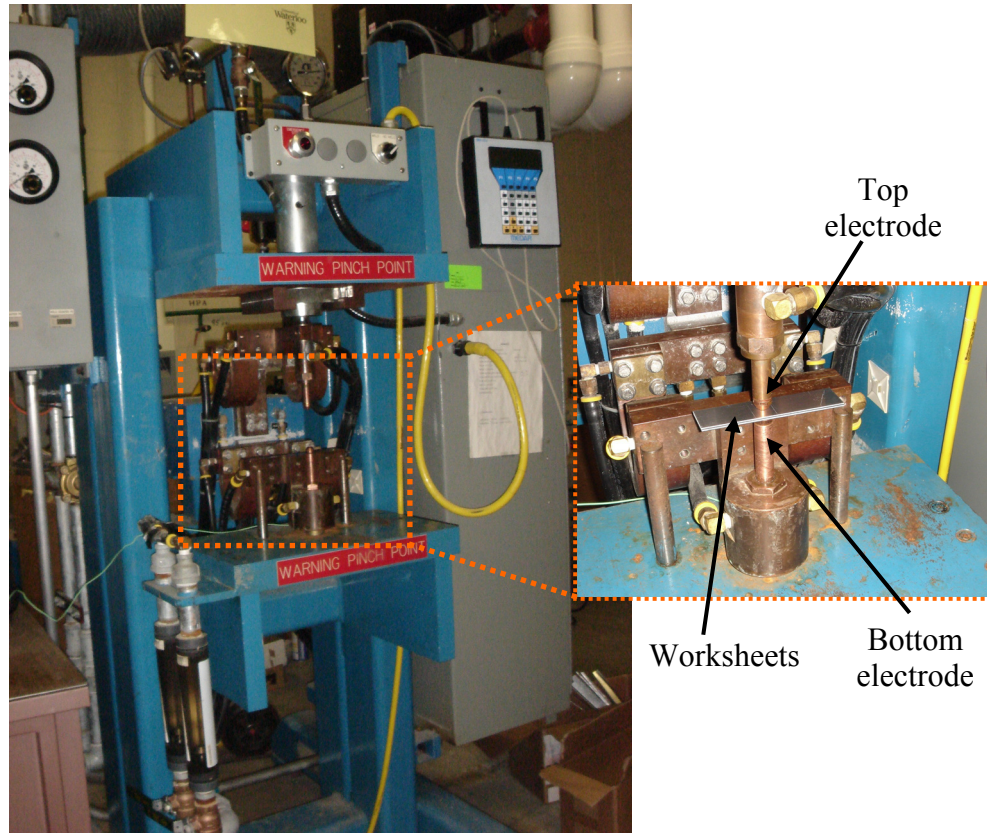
MFDC Resistance spot welder used in the present study.
